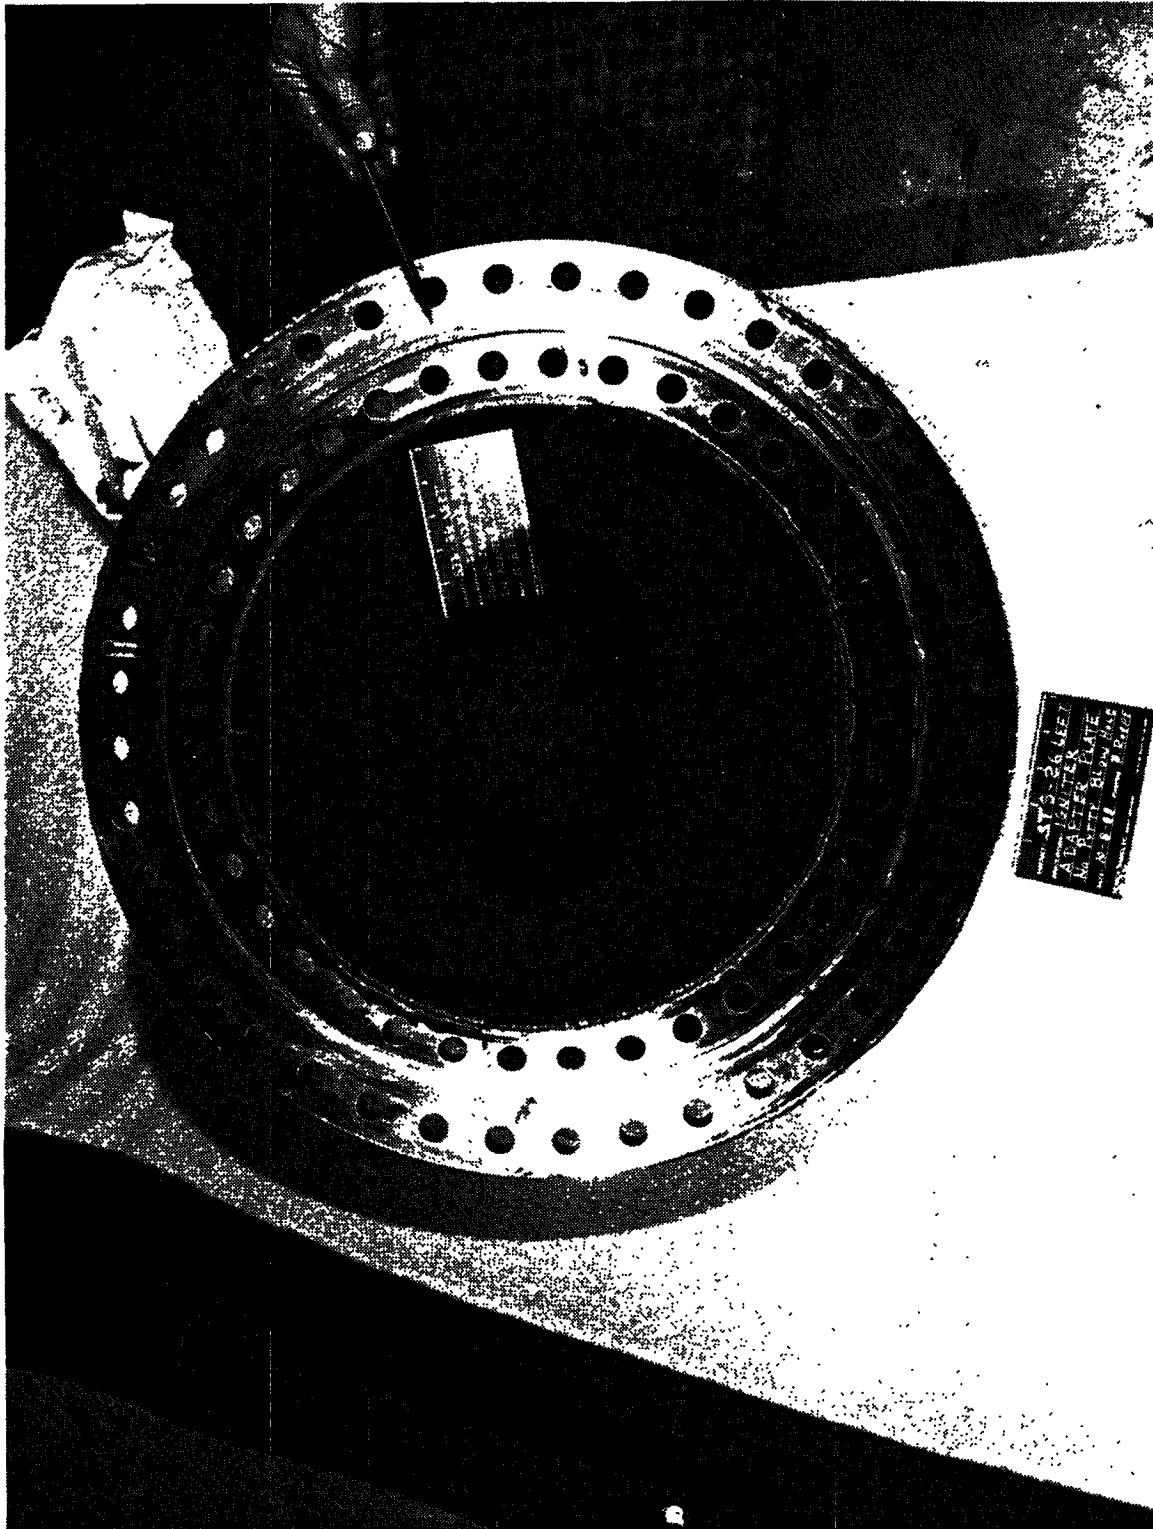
Igniter Adapter Plate Corrosion Left Motor
